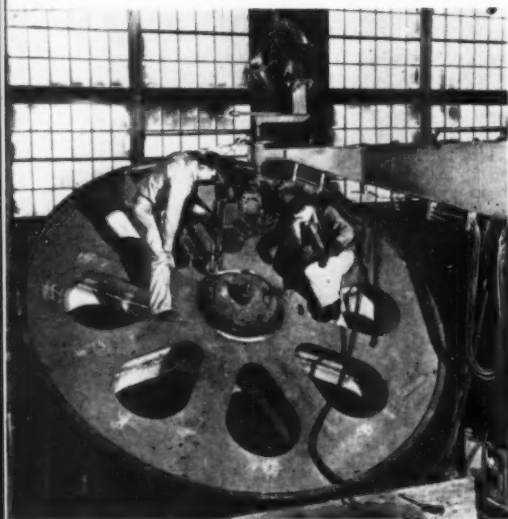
One of two large bull gear wheels to drive a ship's propeller shaft is shown in the welding shop. The wheel turns slowly under the Unionmelt weld-machine as the hub is being welded to the centerpiece.
